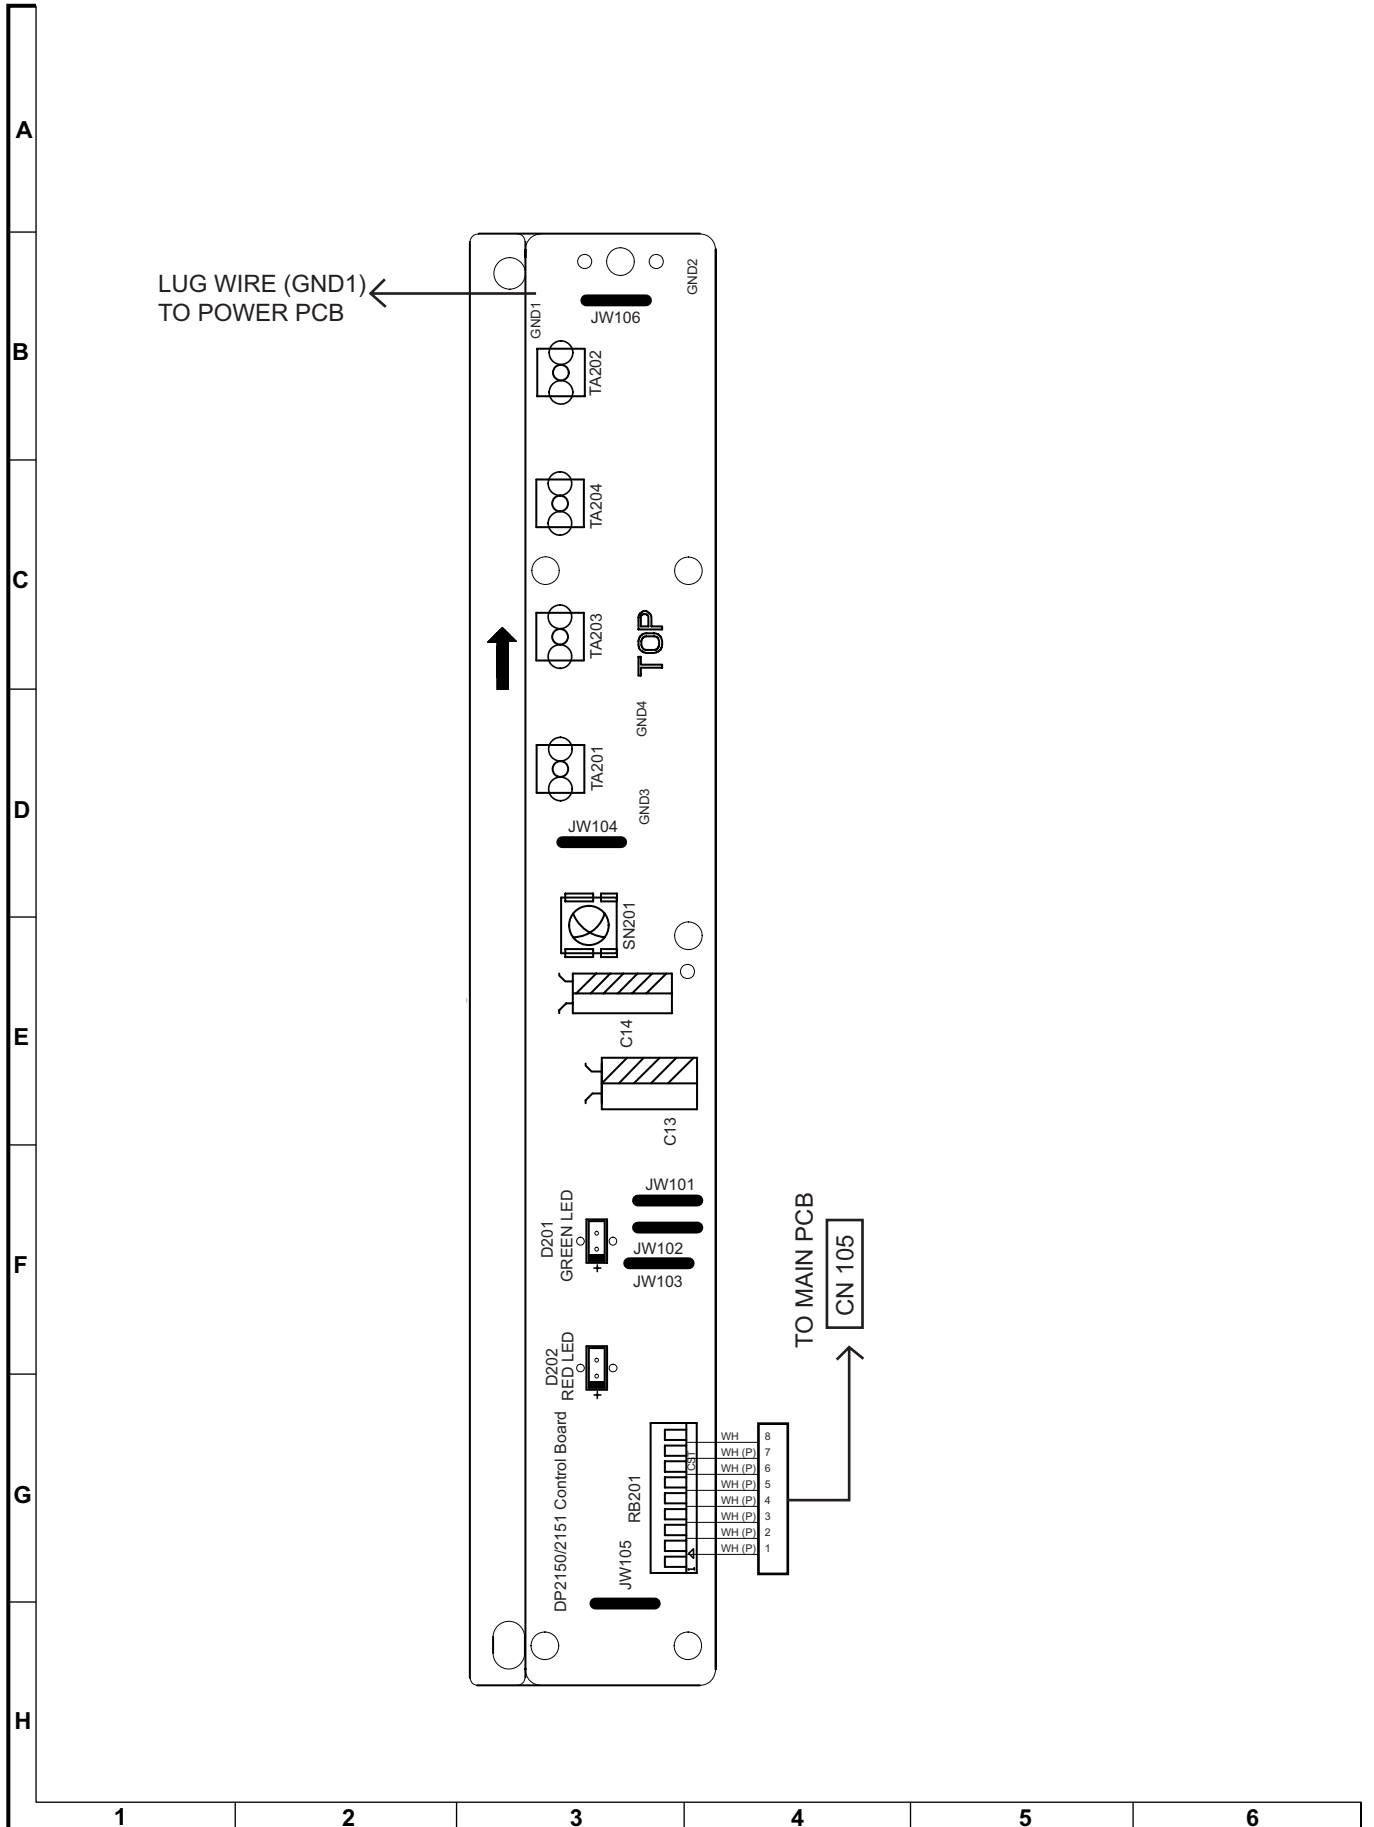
WIRING SIDE OF CONTROL PCB (TOP VIEW)
